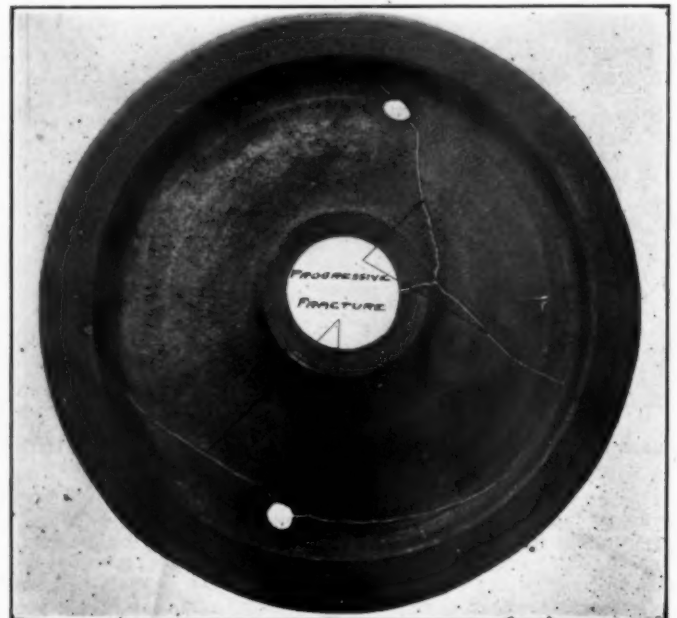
Service Failure of a Wrought Steel Wheel By Fractures Starting from Holes Burnt in the Plate
